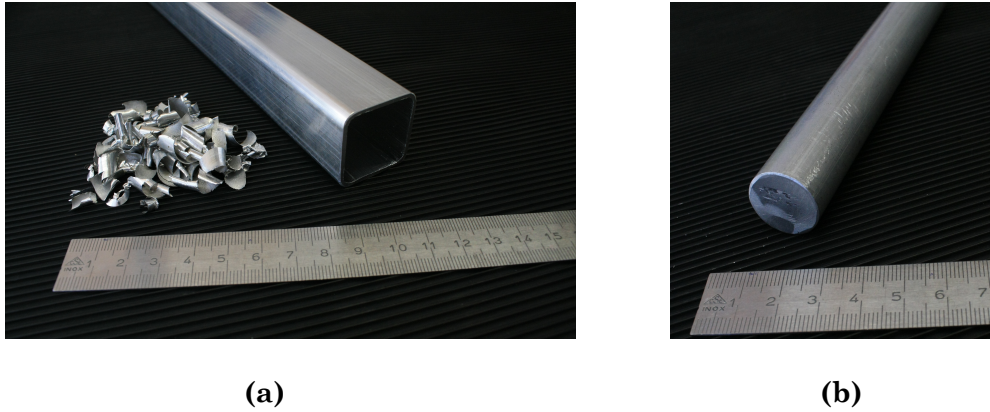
AA6061 aerospace chips extruded into (a) hollow section (b) circular rod
